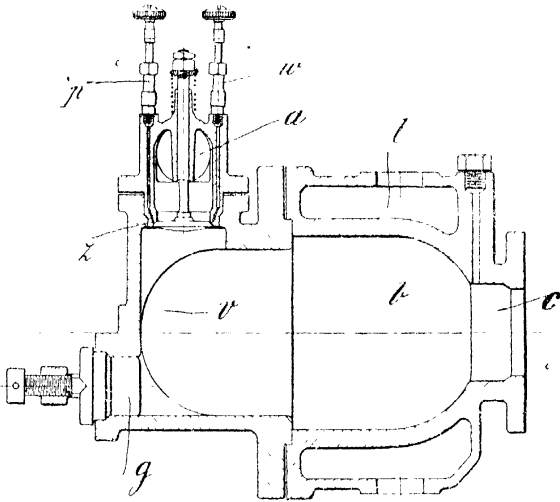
Sectional elevation of vaporiser for Duddidge crude-oil engines, showing shifting-spray injection for fuel and water.
